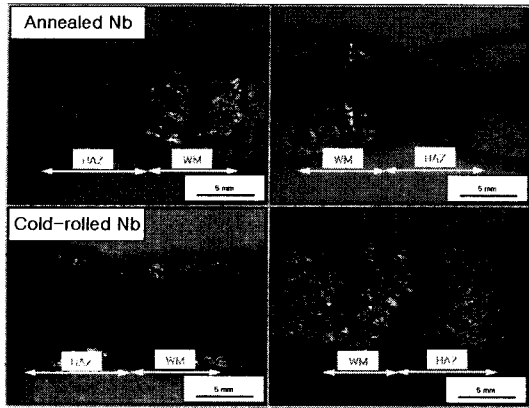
Fracture configuration of transverse weld tensile samples.
